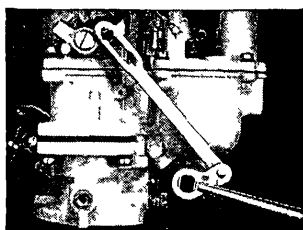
Remove throttle shaft arm and screw and fast idle connector link
